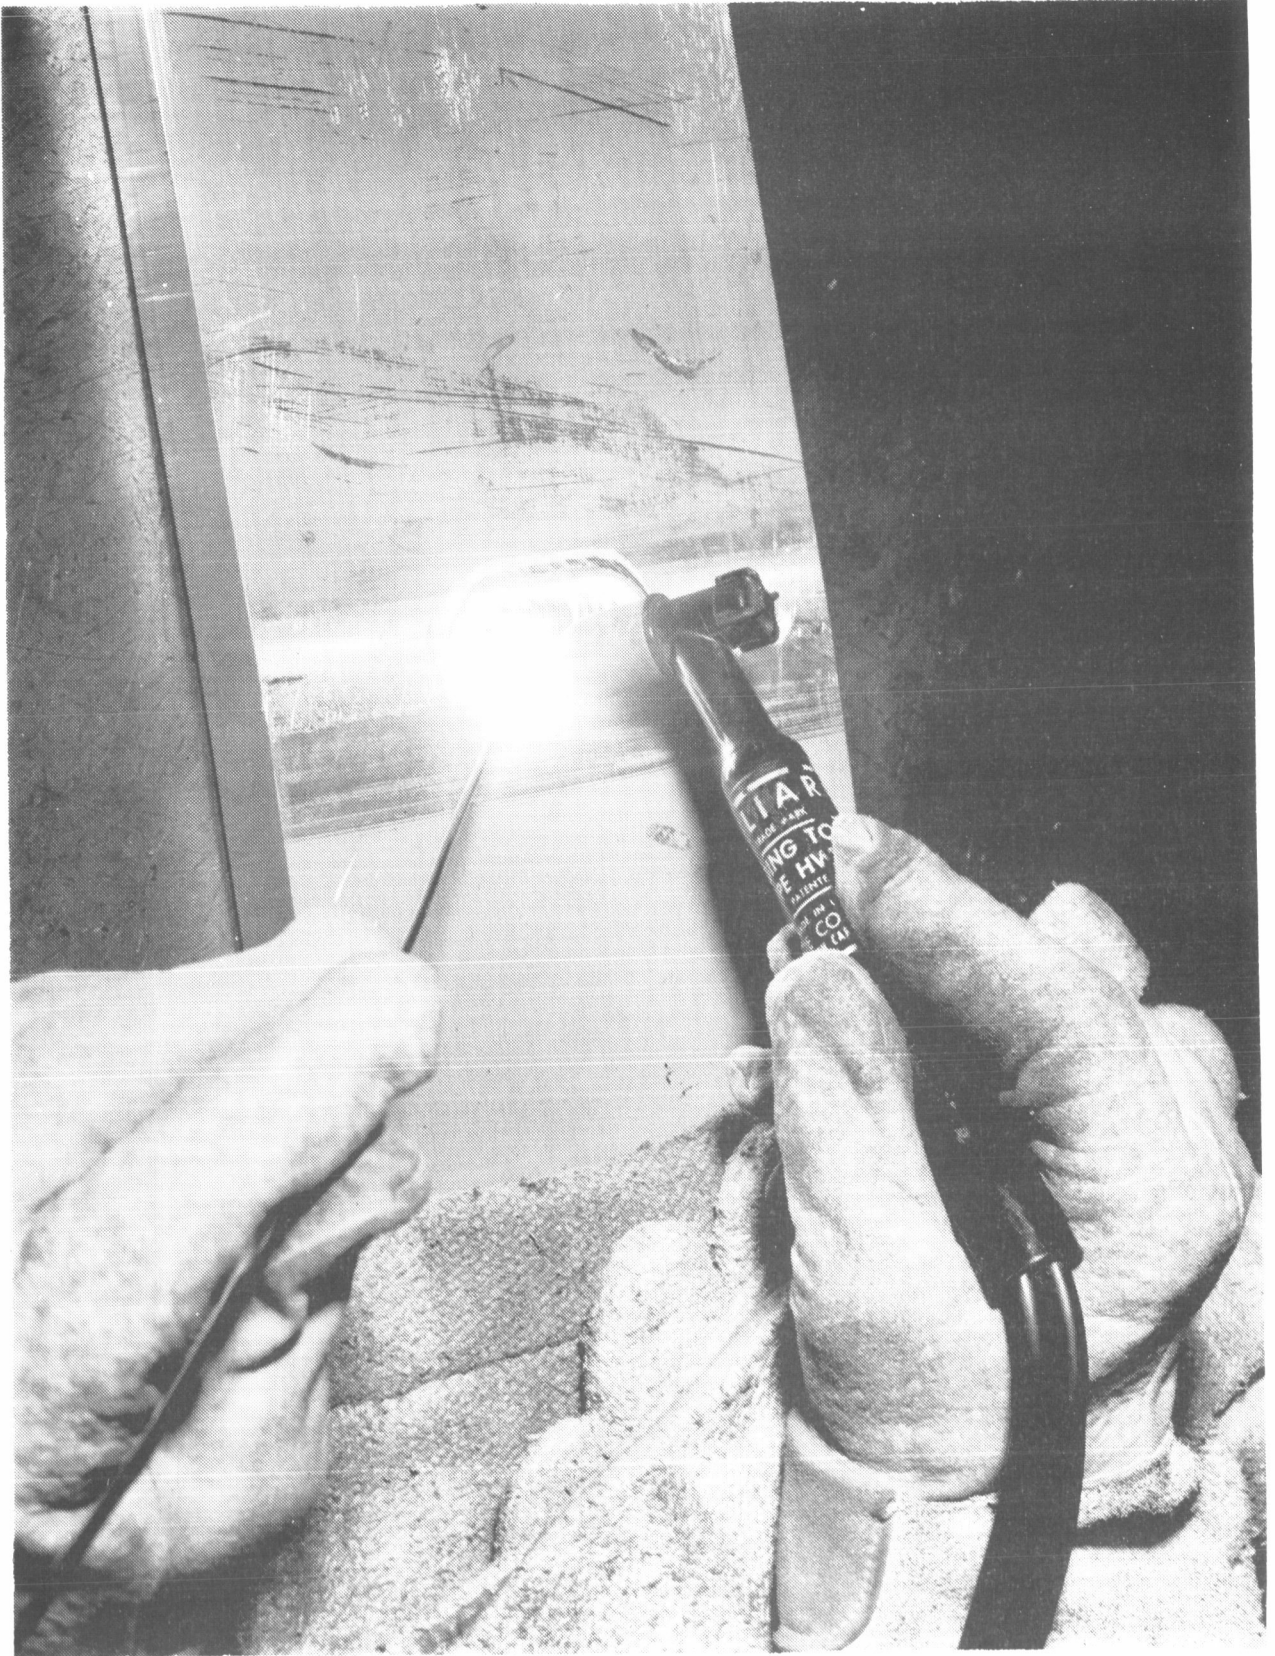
Repair Welding of 1.0-Inch Plate Material
